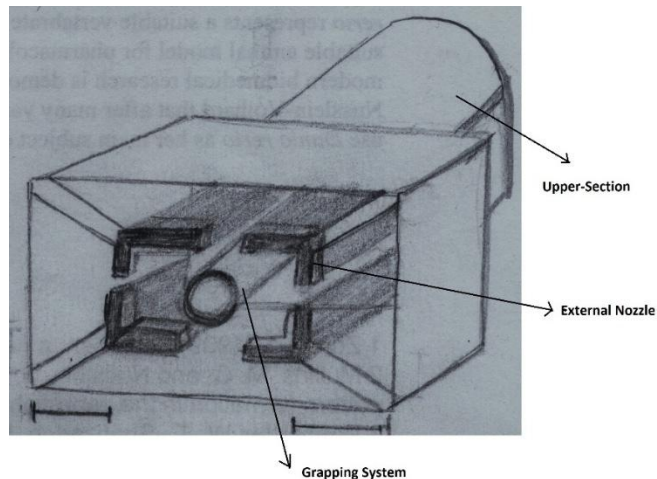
Gripper parts based on an air-vacuum nozzle
